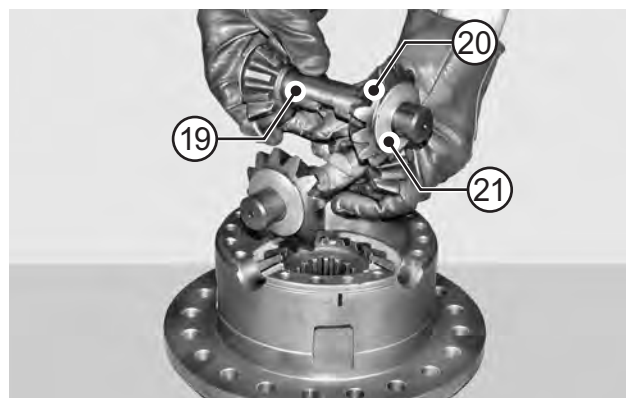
Remove shafts (19), complete with planetary gears (20) and spherical shoulder washers (21).
